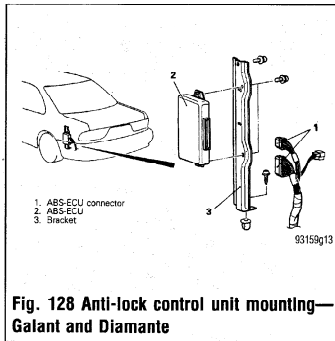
Anti-lock control unit mounting—Galant and Diamante
